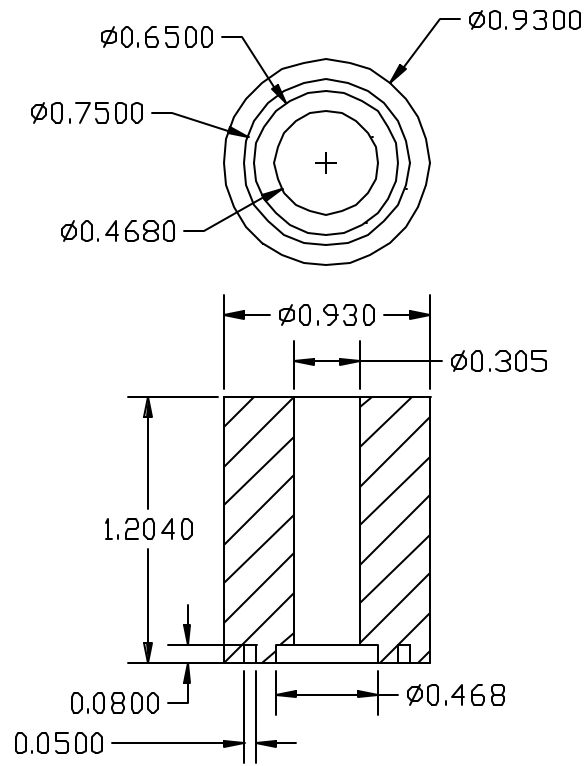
CAD drawings of the Teflon part for the emitter (all dimensions are in inches)
